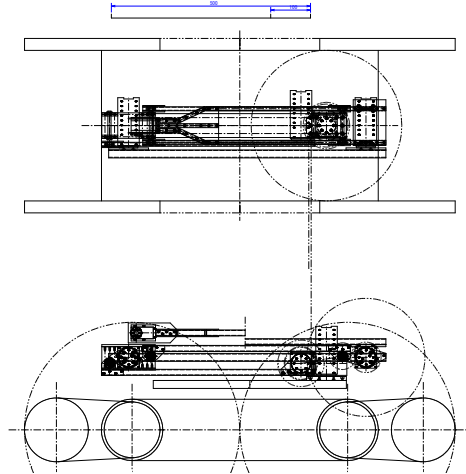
CAD design of 7 DOF manipulator equipped on the robot.
